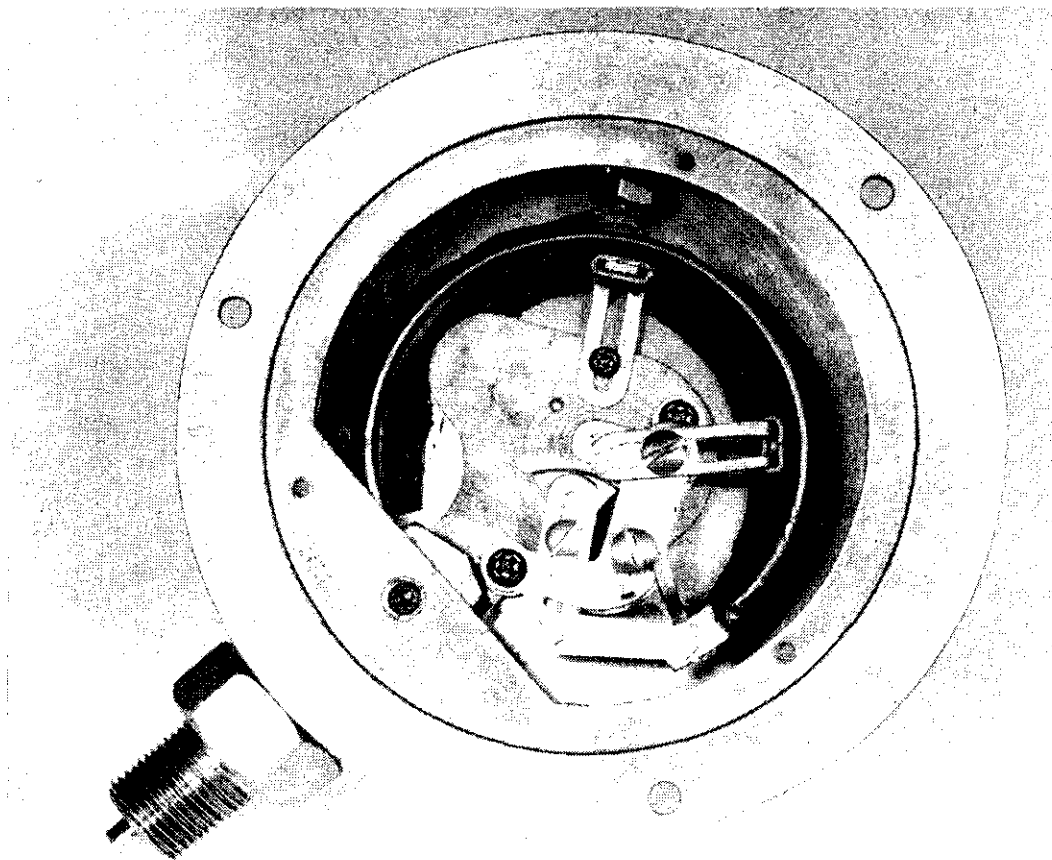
MODIFIED GAUGE WITH RUBBER STOPS AND CUSHIONS
